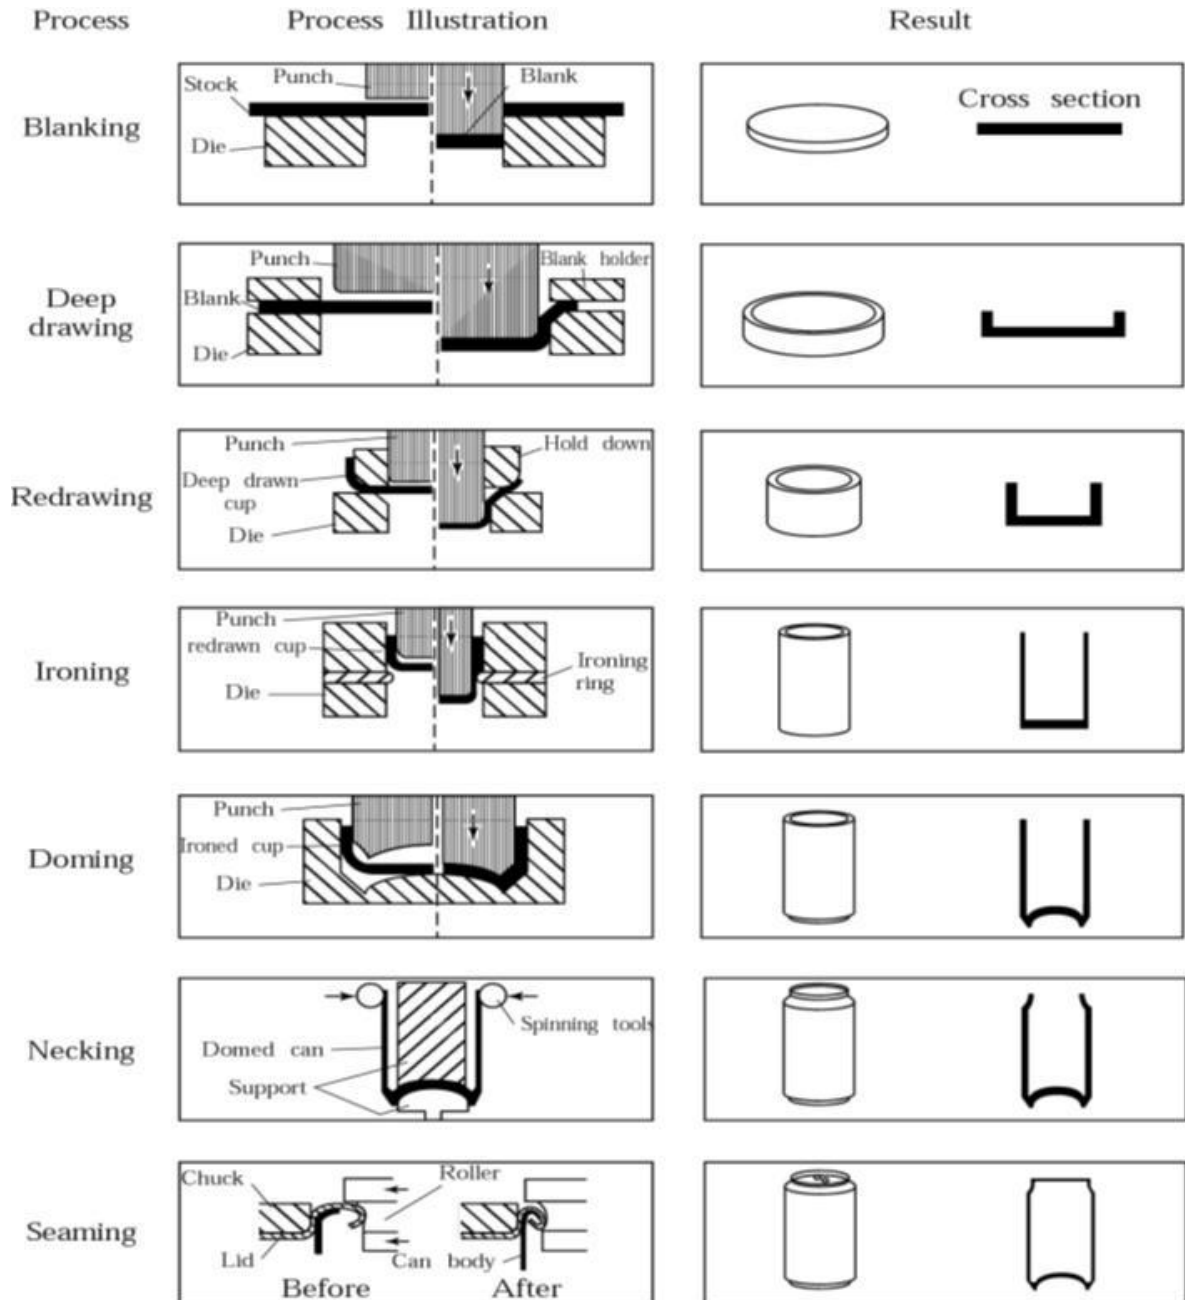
The metal-forming processes involved in the manufacturing a two-piece beverage can (Source: Kalpakjian.S, Schmid.S.R., Manufacturing Engineering and Technology, 2006, 4th Edi, Pearson Edu.)
